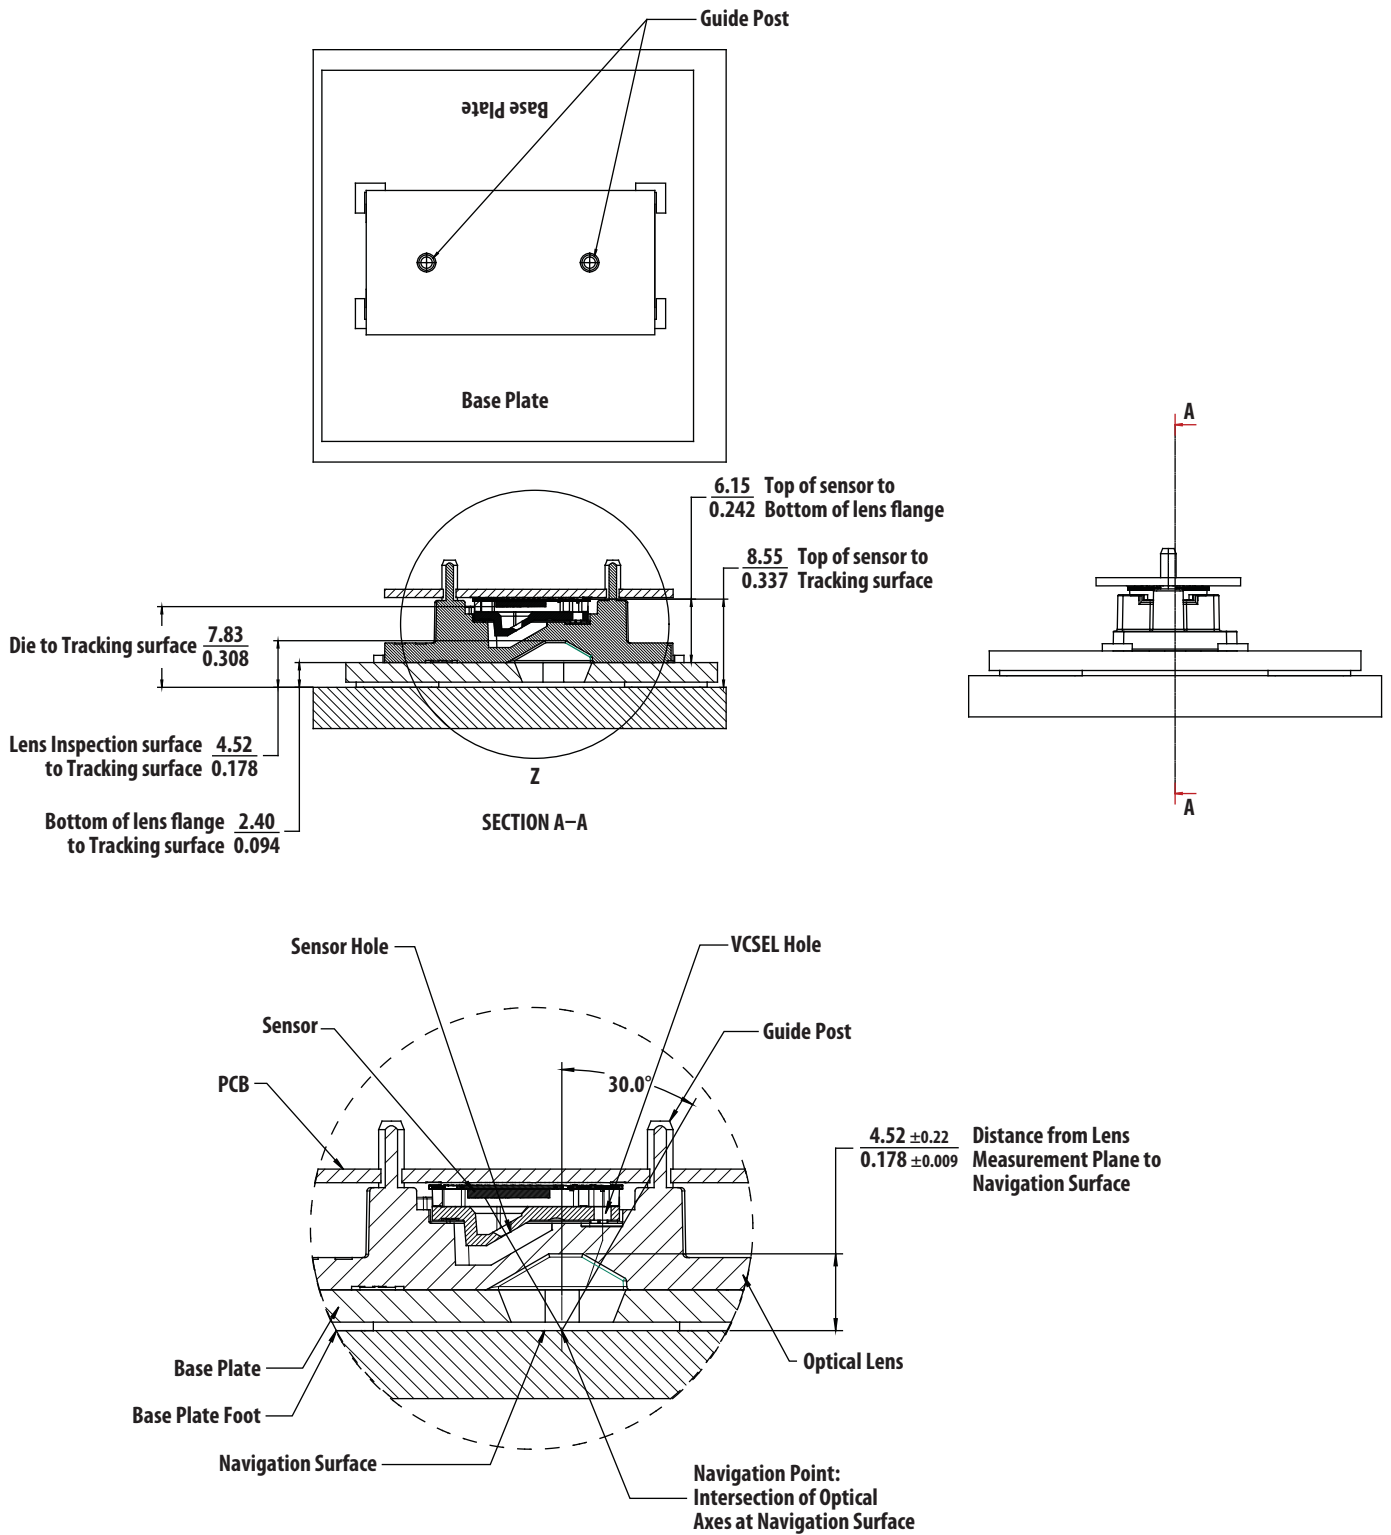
2D assembly drawing of ADNS-7630 sensor coupled with ADNS-7100-001 lens, PCB & base plate
